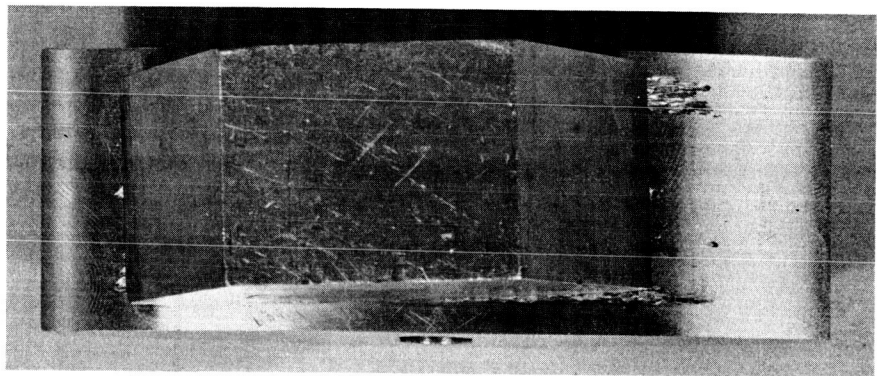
BALL JOINT TEST SPECIMEN TYPE - 6;
